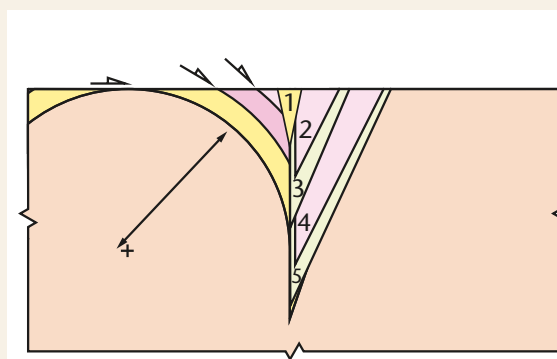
The cut sequence for a canted V-groove. The symmetrical V-cut 1 is optional, and instead one could start with a deepening cut followed by a clearing cut. V-cuts 2 and 4 are clearing cuts, V-cuts 3 and 5 are deepening cuts. If the half bead springs with a tall vertical face, you should offset the vertical face of the V-groove by about $\frac{1}{16}$ " (1mm) to allow for the final rolling cut to cut the whole surface of the half bead.
